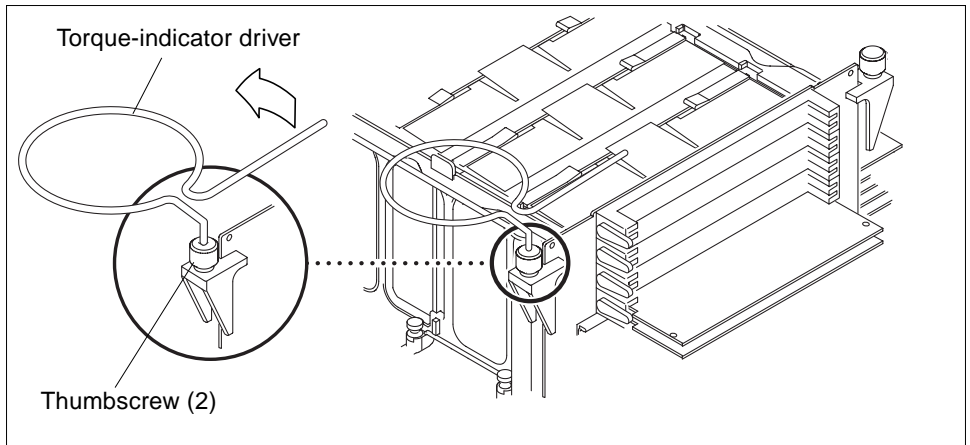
Removing the Memory Riser Assembly (Sheet 1 of 2)
